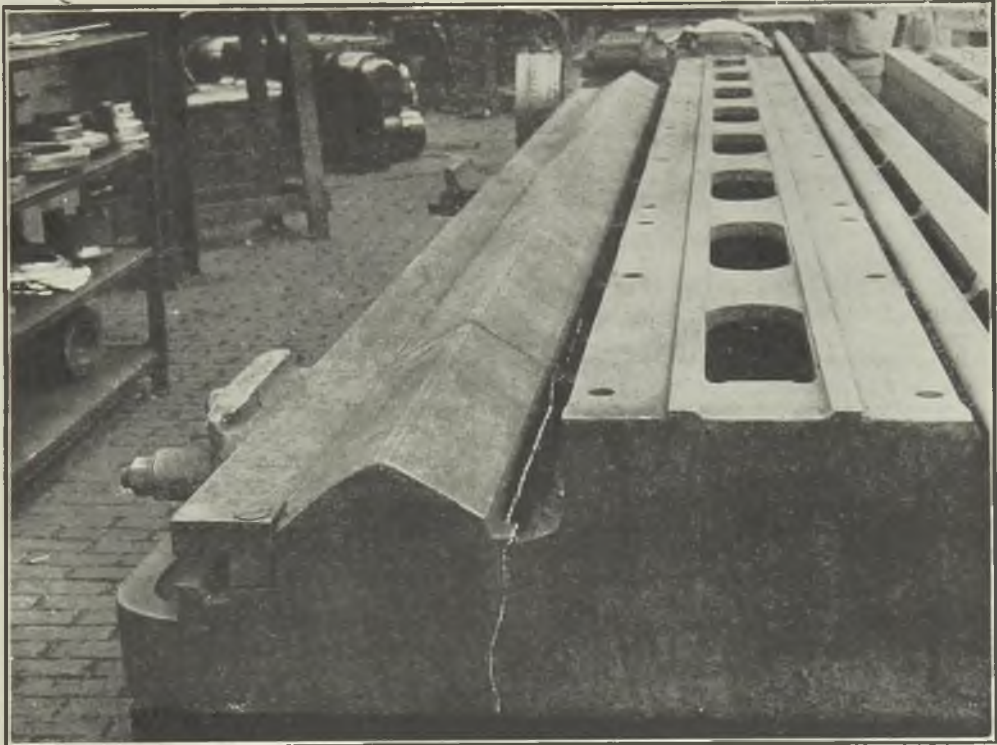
VERTICAL FRACTURE IN A PLANING MACHINE BED.
